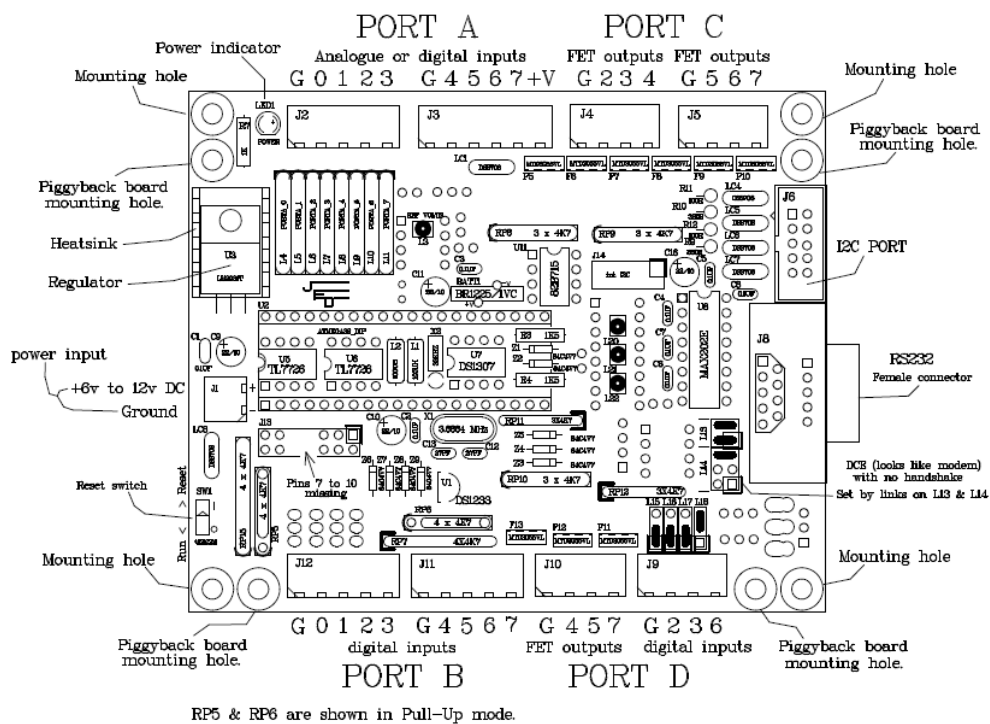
JED AVR200 Single Board Computer PCB layout (JED 2008)
